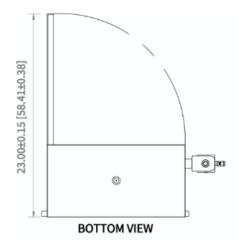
Model 131S External Components & Dimensions/Clearances Inches [cm]
